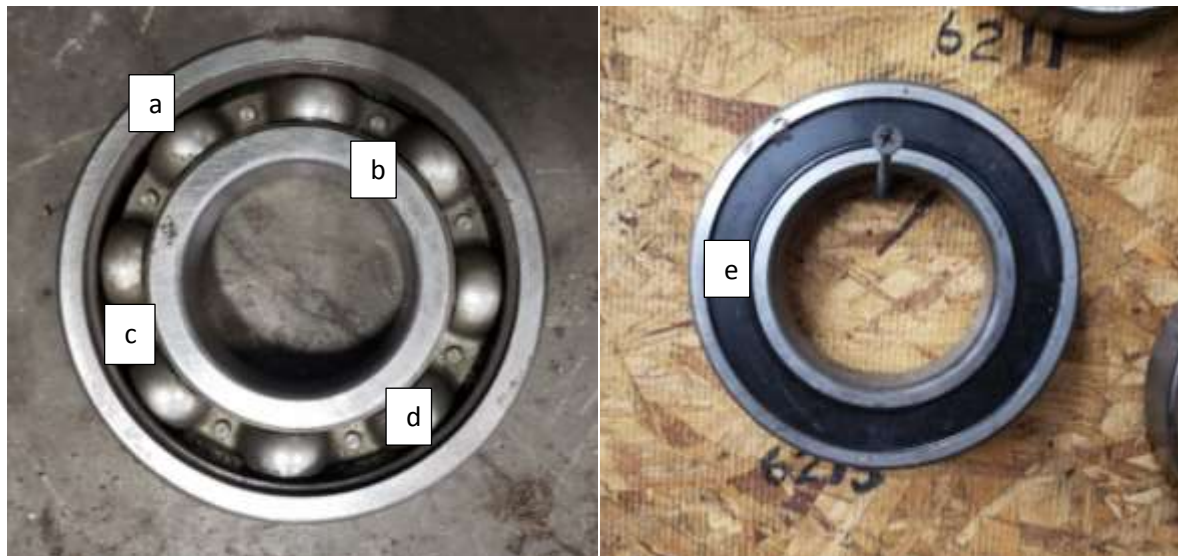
Bearing components. (a) Outer race. (b) Inner race. (c) Cage. (d) Ball or roller bearing. (e) Bearing seal
